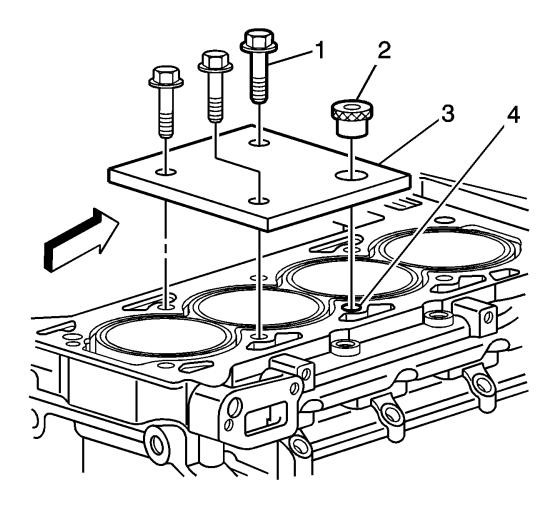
Fixture Plate, Bolts And Bushing Courtesy of GENERAL MOTORS COMPANY
